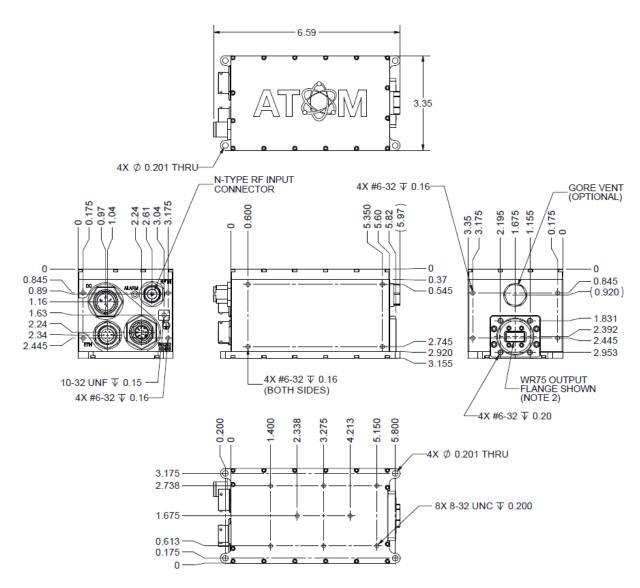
40-80W Ku GaN BUC/SSPA, Baseplate Cooled
